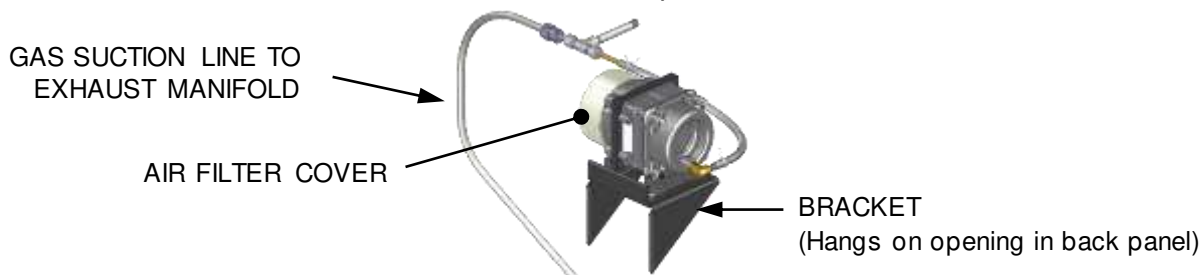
Air Eductor Assembly – BMK5000 & 6000
